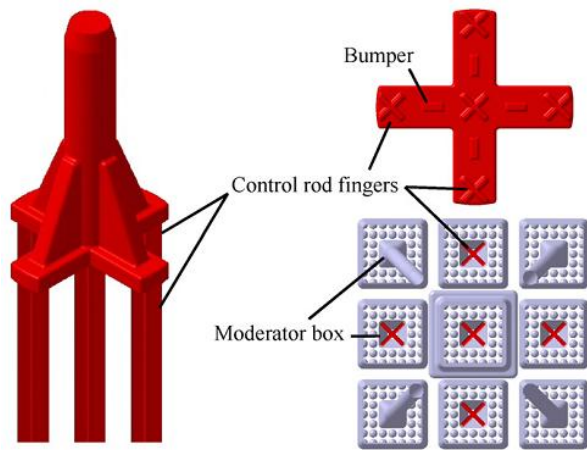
Control element (left), bottom view (top side), and cruciform control rod fingers instead in square moderator boxes (bottom right)
